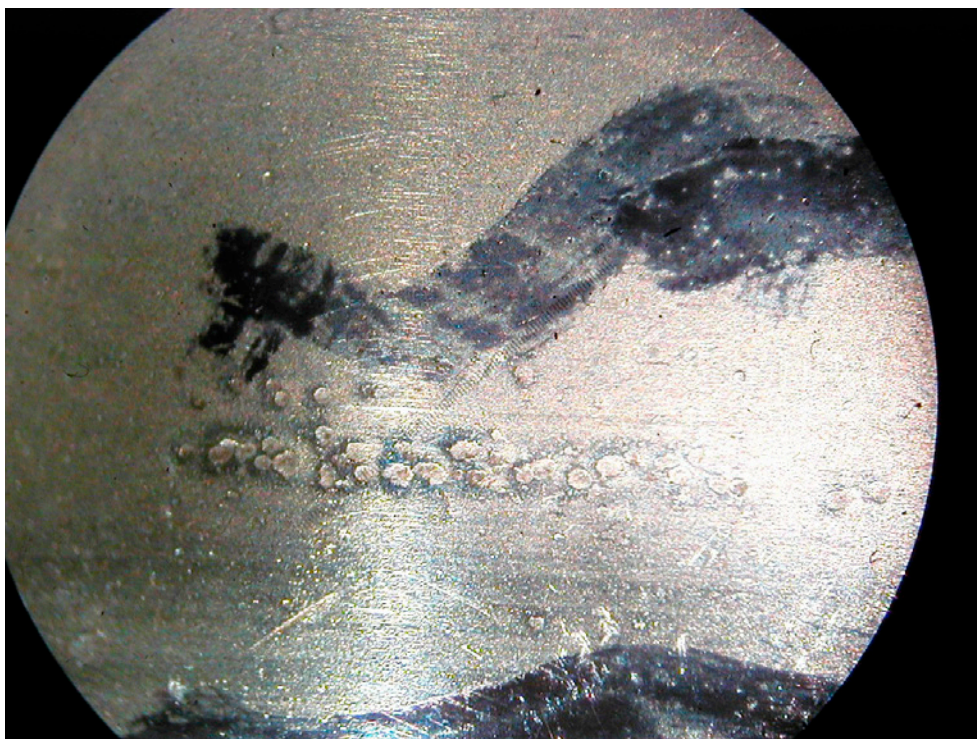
Microscopic view of corrosion pits on a roller bearing raceway, the small round pits between the two heavy black pen marks were caused by corrosion.
